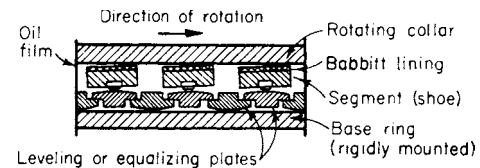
Kingsbury thrust bearings. (Developed cylindrical sections.)
